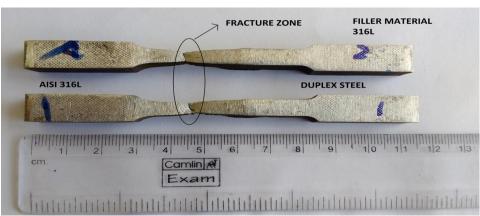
Tensile failure of weld joint fabricated with ER 316L filler wire
